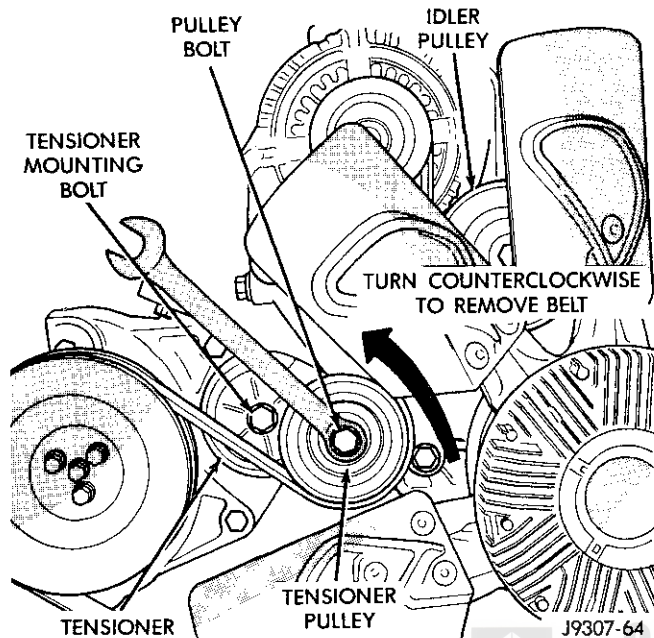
Belt Tensioner—5.9L HDC-Gas Engine
